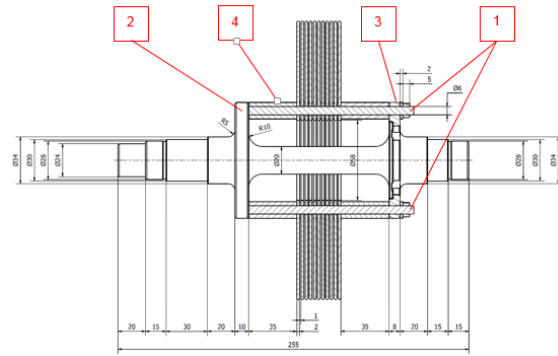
The alternative concept for the rotor of Tesla turbine. 1 – binding bars, 2 – solid disk manufactured as an integral part of the shaft, 3 – removable disk, locked on the shaft by a hollow joint, 4 – spacing sleeves
